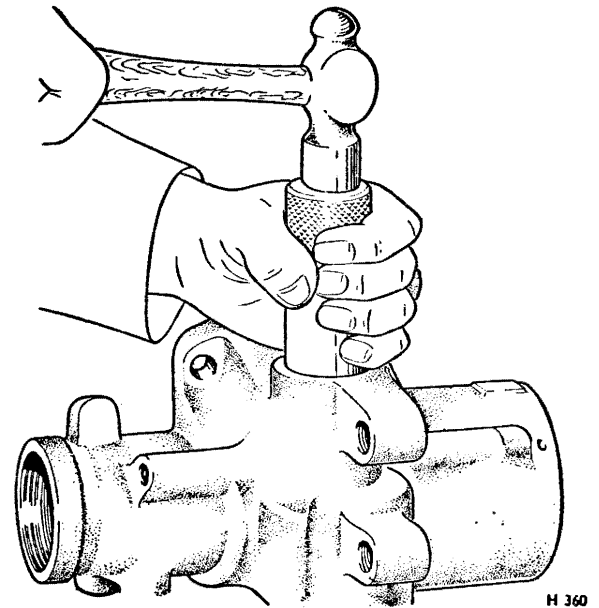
INSTALLING ROCKER SHAFT SEAL
